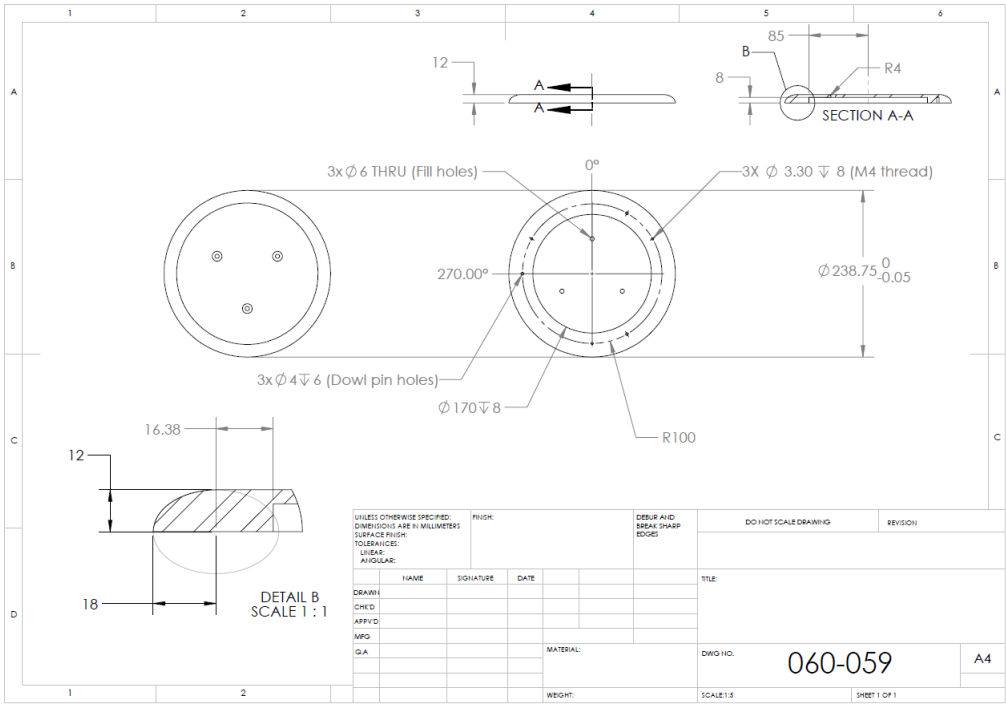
Drawing of the face plate for the HV and ground electrodes. The radius of the groove is optimised for this geometry.
